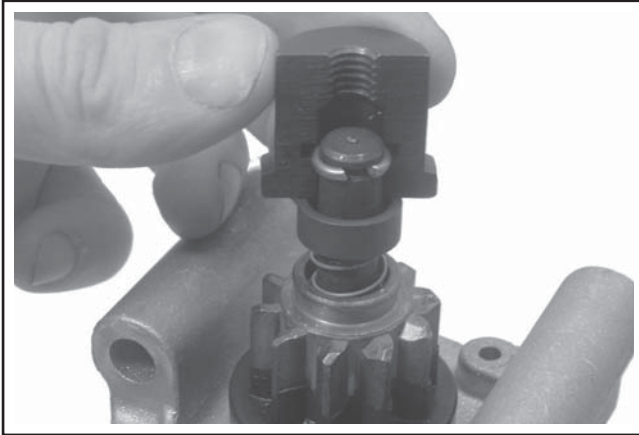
Drive Components, Inertia Drive Starter.
